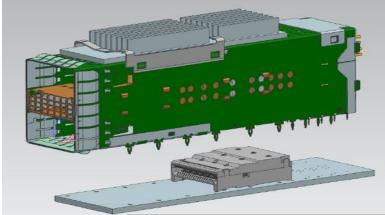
Lower SMT connector, upper press fit connector, and the 2x1 cage
